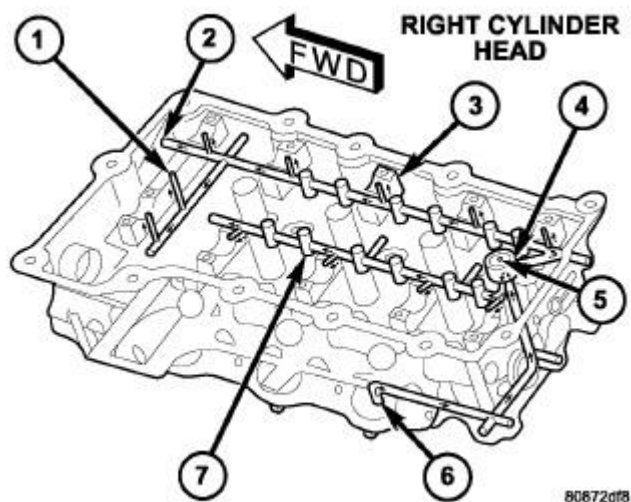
Cylinder Head Oil Lubrication System - Right Side
